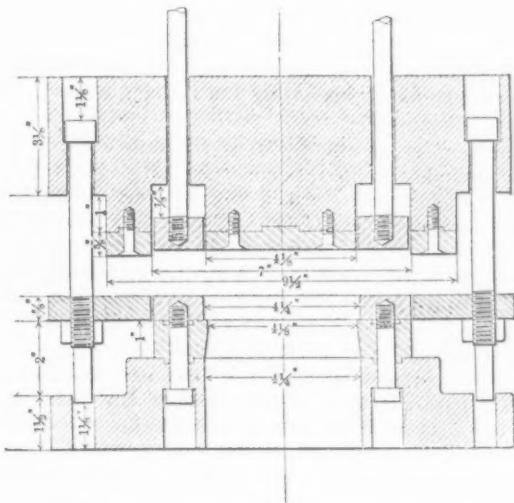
Section of Both Top and Bottom Dies at A A.
